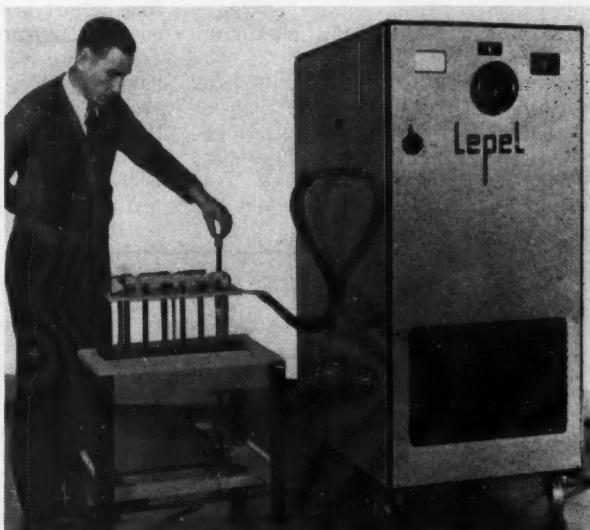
Spark-Gap Induction Heater with Fixture for Brazing Six Bushings in a Single Operation.
